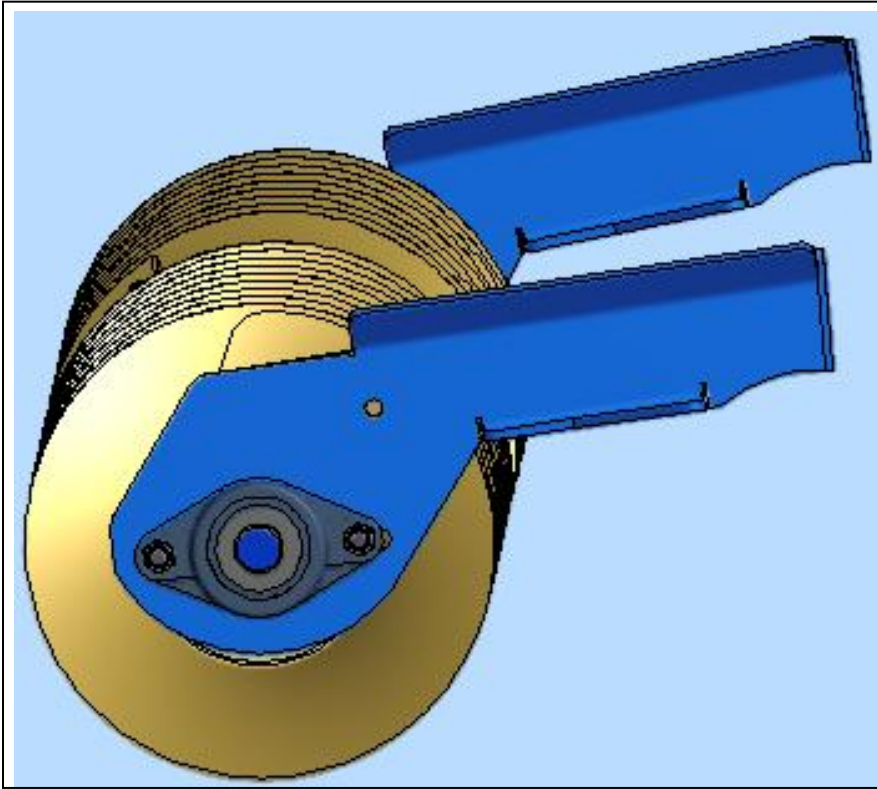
LEFT END WELD ON MOUNT (END VIEW)
